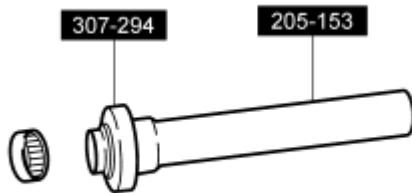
Removing No. 17 Stator Support Bearing Using Special Tools
